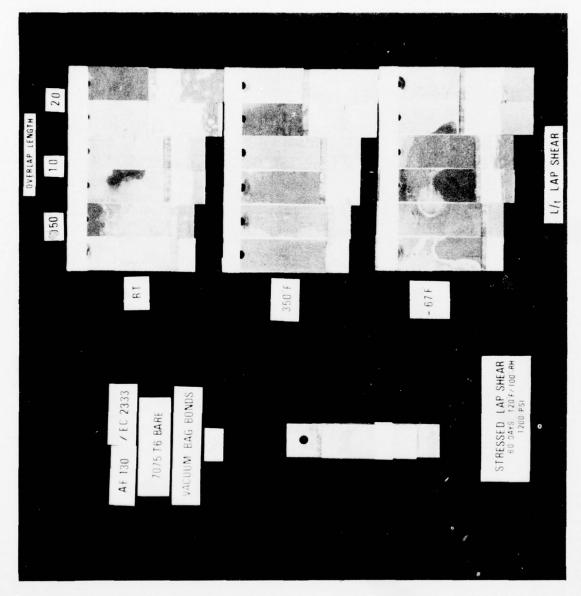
Specimen Failure Surfaces—AF 130, Non-Tank Anodized, Vacuum Bag Bonds
